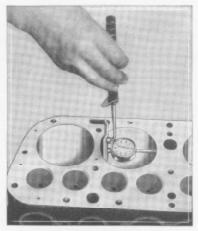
Application of Cylinder Gauge Checking Cylinder Bore for Wear
